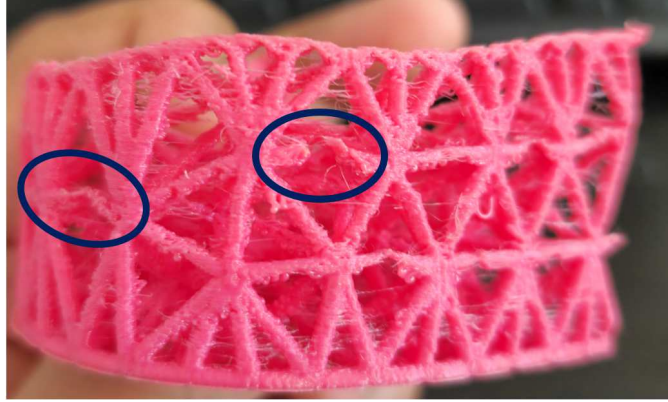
Manufacturing defects by FFF 3D printing.
